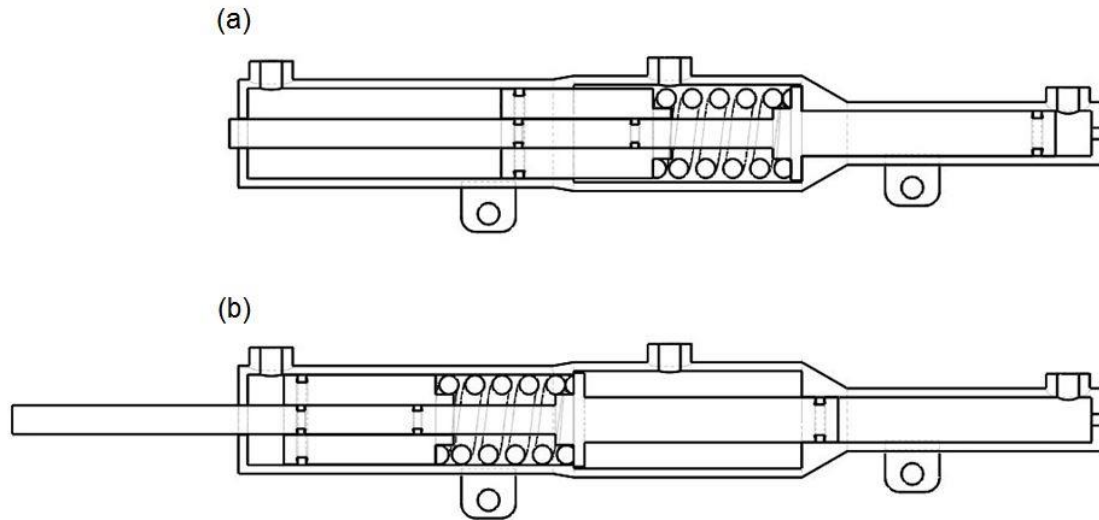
HSEA design in (a) retracted and (b) extended positions.
